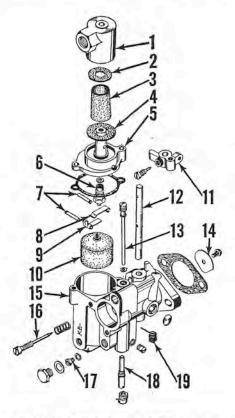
Exploded view of Tillotson carburetor of the type used.
